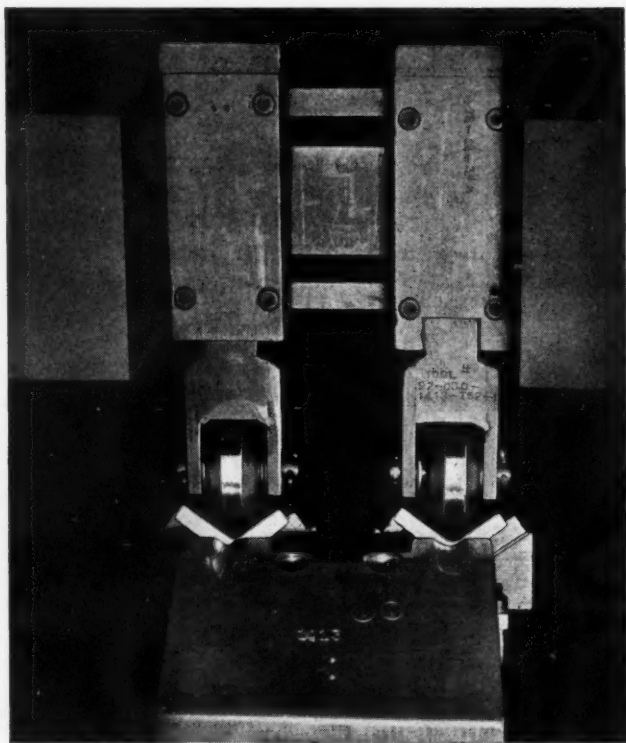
End View of the Supporting Fixture, Showing Relation of the Ramp and Rollers
